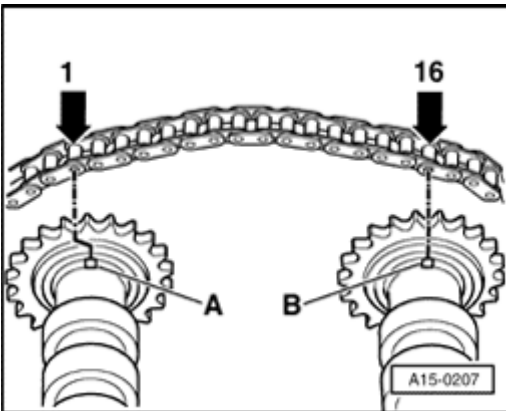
First And Sixteenth Drive Chain Rollers Installed On Chain Gears
